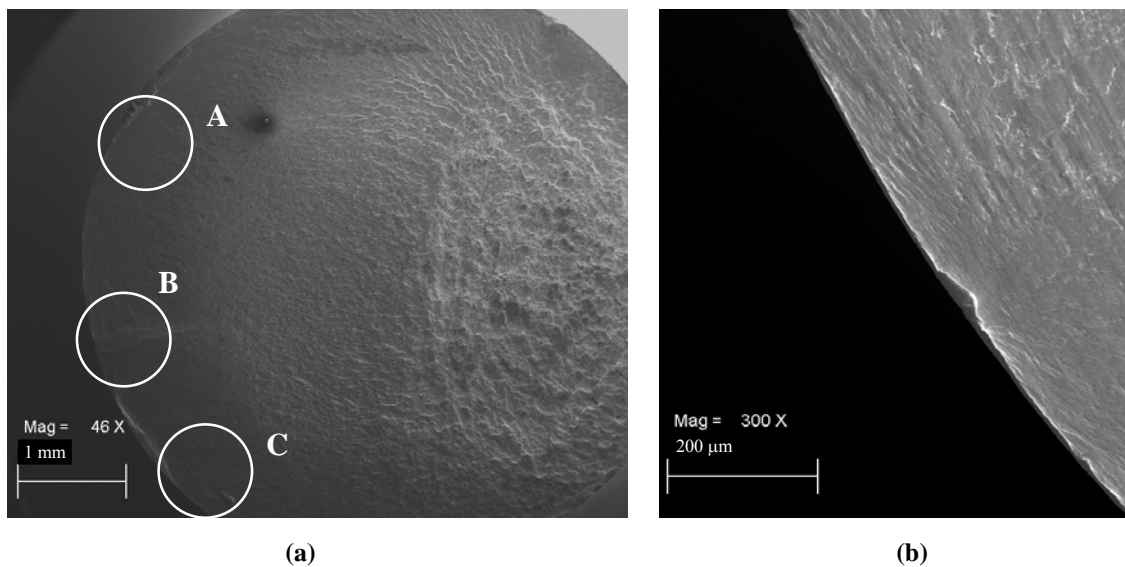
(a) Fracture surface overview of an uncoated specimen and (b) higher magnification of C [3.21].
